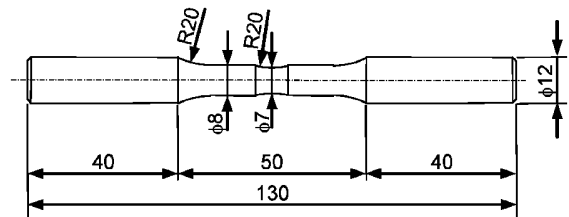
Shape and dimensions of AC4CH fatigue samples.
